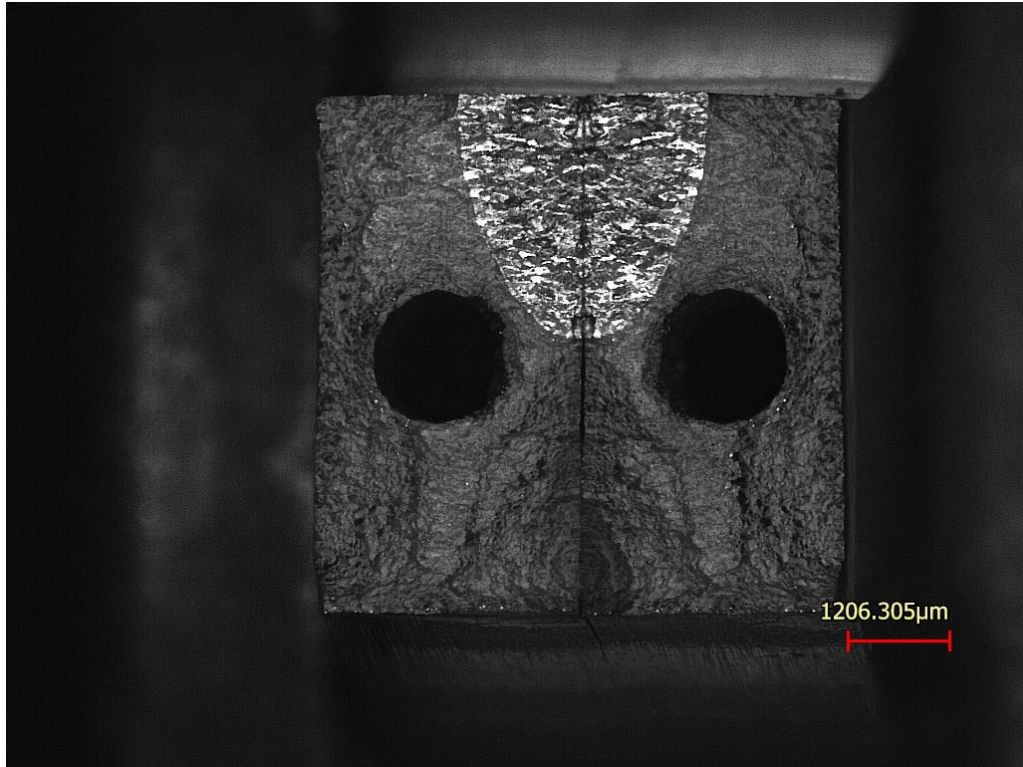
Specimen E2 fracture surface (3,000,000 cycles : 56.73 ksi / 391.2 MPa)
